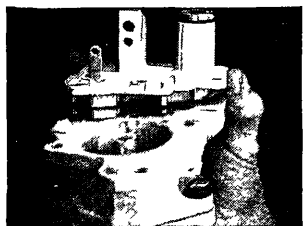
Install bowl cover, using new gasket. Pull screws down evenly. Install idle passage plug and gasket (center of bowl cover)
